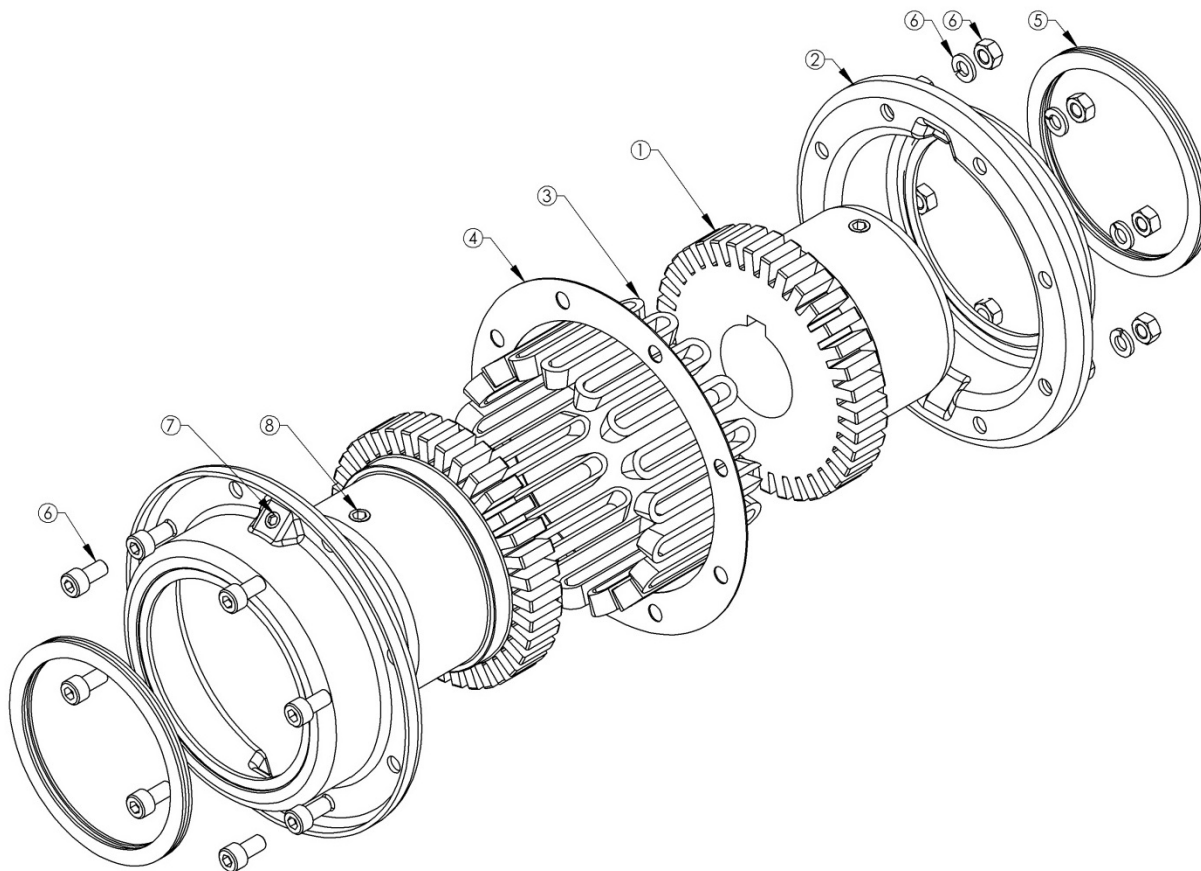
VERTICAL (T20) TAPER GRID COUPLING (EXPLODED VIEW)
